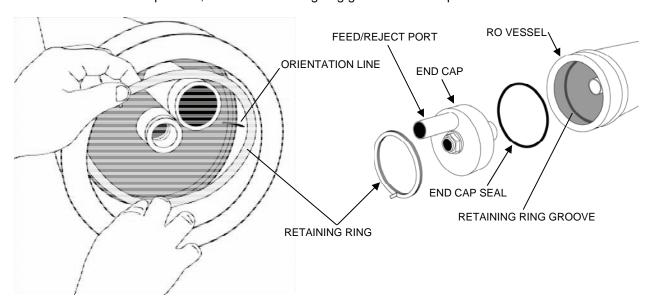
RO Vessel End Cap and Retaining Ring Installation.
